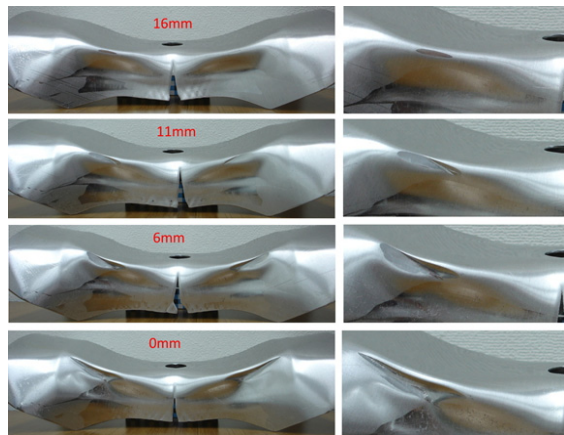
Press forming of unannealed aluminum plate by changing the slide position of 16 mm, 11 mm, 6 mm and 0 mm from bottom dead center.
